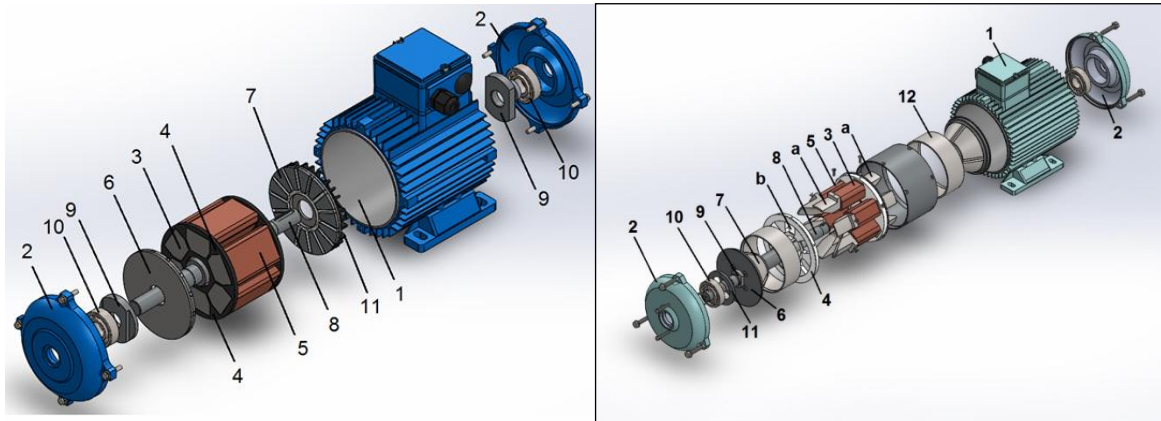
The exploded machine assembly with modified transverse geometry with axially and conically air gap
